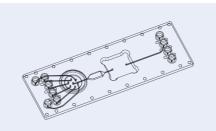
Turning valve sensor platform II Fluidic 1156 with bubble trap and Mini Luer interfaces
